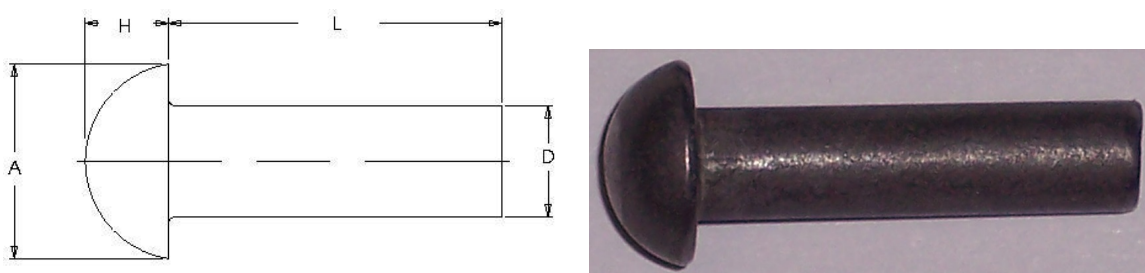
Rivet geometry: A – factory head diameter; H – factory head length; L – shaft length and D – shaft diameter.
